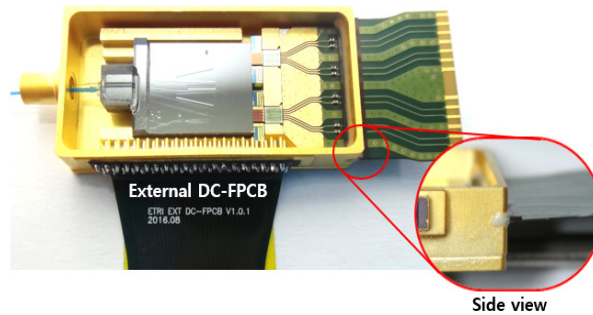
Photograph of fabricated micro-ICR module before attaching internal DC-FPCB and magnified side view of the epoxy sealed region.
